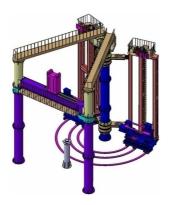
The Overall Configuration of the Sector Sub-assembly Tool.
